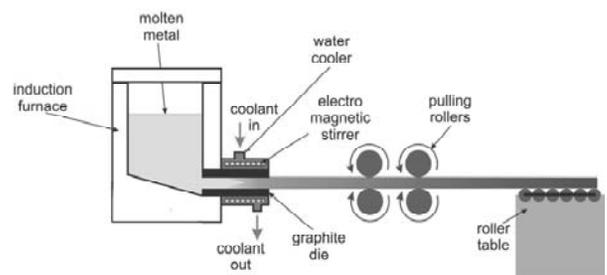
Scheme of stand to continuous casting of grey cast iron ingots with circular section
